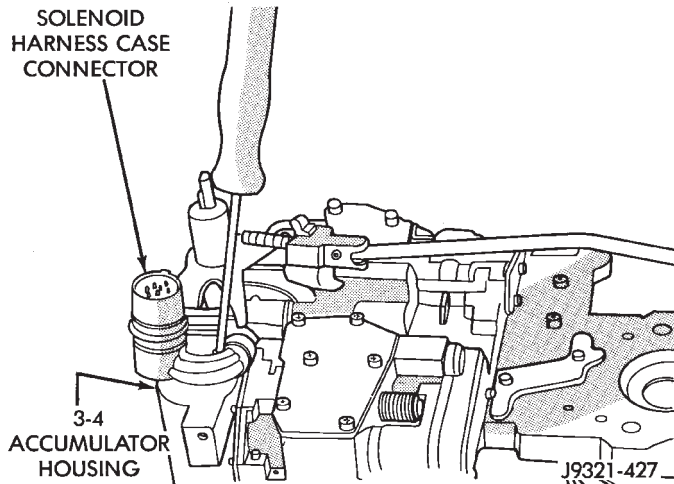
Solenoid Harness Case Connector Shoulder Bolt
